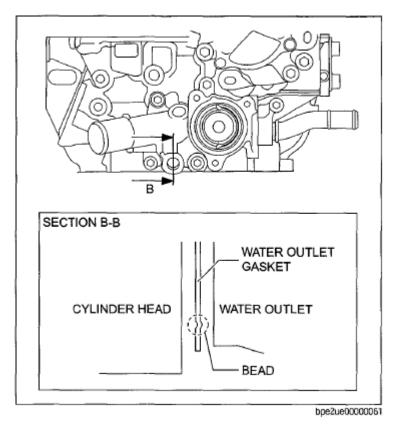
Identifying Water Outlet, Gasket, Cylinder Head And Gasket Bead
